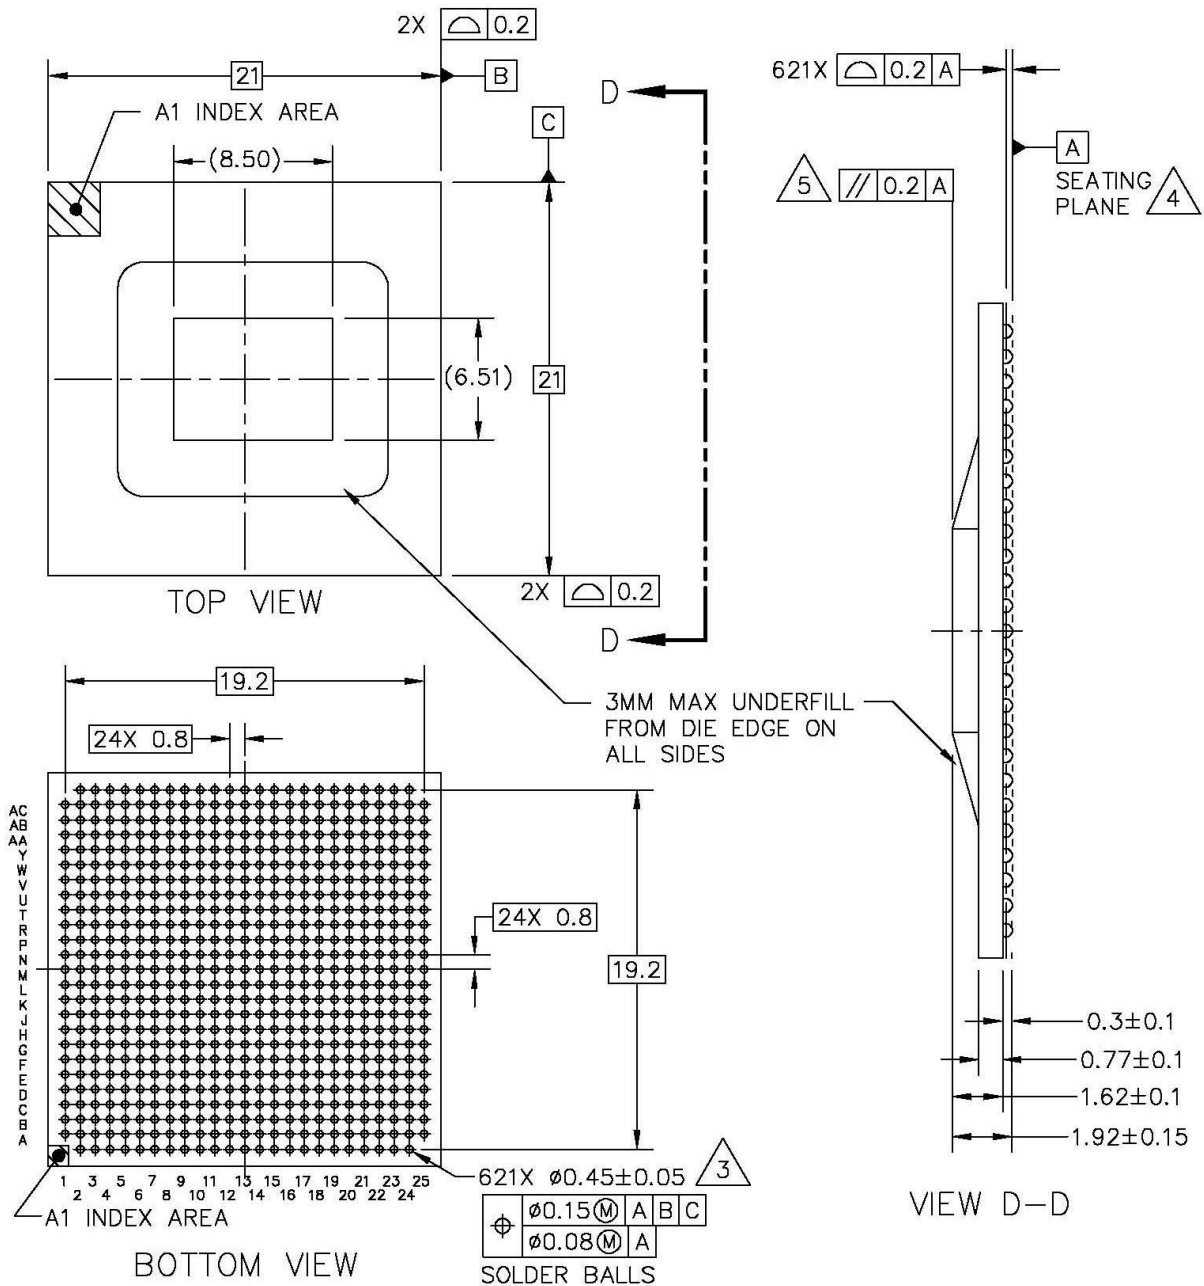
Mechanical dimensions of the FC-PBGA 21x21 mm (621 balls)
